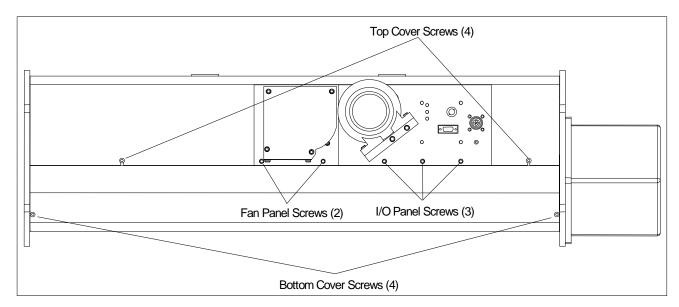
Top Cover Screws, Bottom Cover Screws, Fan Cover Screws, and I/O Panel Screws
